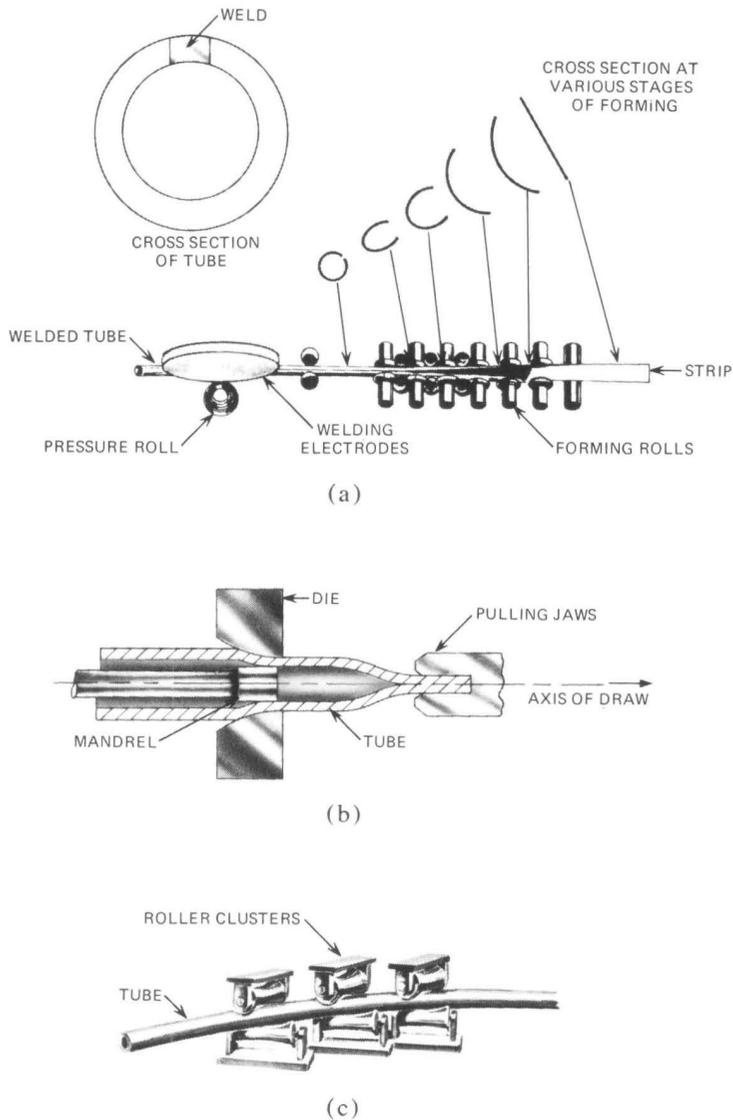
Manufacturing process for steel tube. (a) Tube forming and welding. (b) Cold drawing. (c) Roller straightening.
